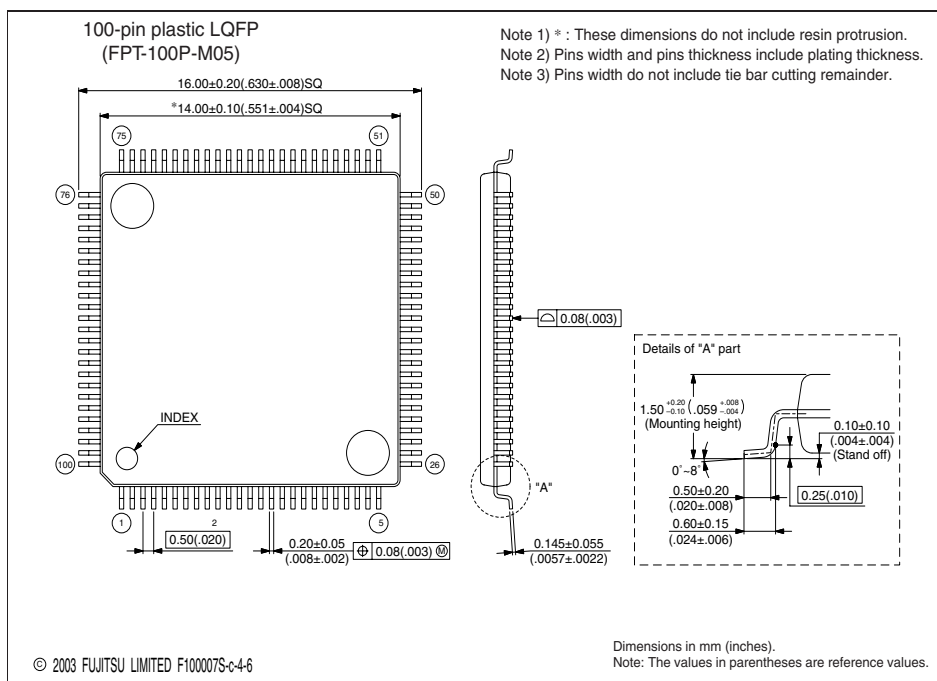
"Outside Dimensions of FPT-100P-M05 (LQFP-100)" shows the outside dimensions of the FPT-100P-M05 (LQFP-100) package. Figure 1.4-2 "Outside Dimensions of FPT-100P-M06 (QFP-100)" shows the outside dimensions of the FPT-100P-M06 (QFP-100) package.
